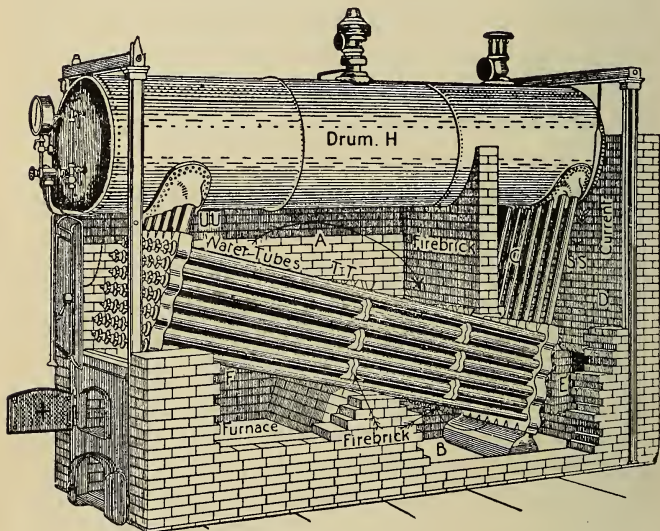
The Babcock and Wilcox water tube boiler. One side of the brick seating has been removed to show the arrangement of the water tubes and furnace. TT, inclined tubes; SS, down flow tubes; UU, up flow tubes; F, furnace; B, mud drum; A, side wall; D, end wall; E, cleaning door.
